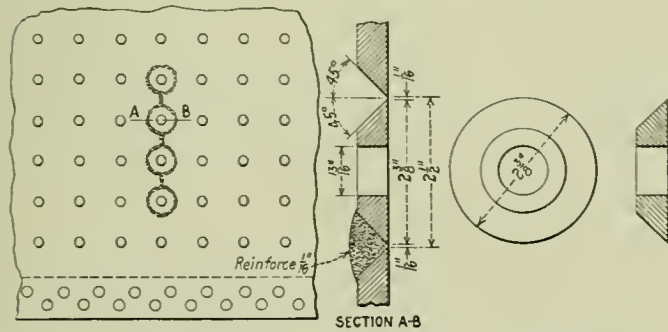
Method of Welding Cracks Through Staybolt Rows; Gas
